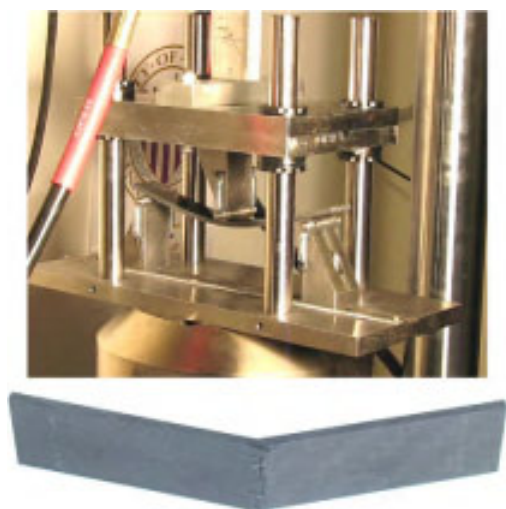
Three-point bend flexure element-level test: specimen in the test fixture being loaded (top) and after failure (bottom).
